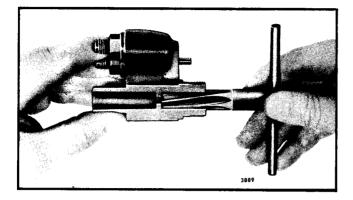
· Cleaning Injector Body Ring with Tool J 21089
